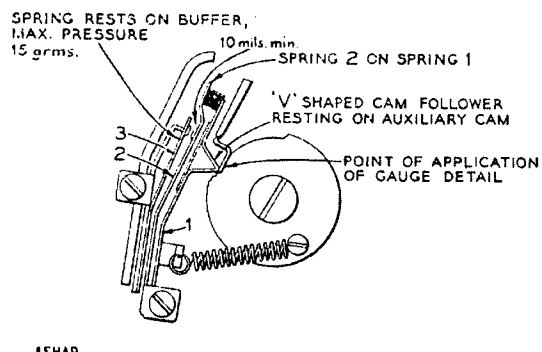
ADJUSTMENT OF AUXILIARY SPRINGS
